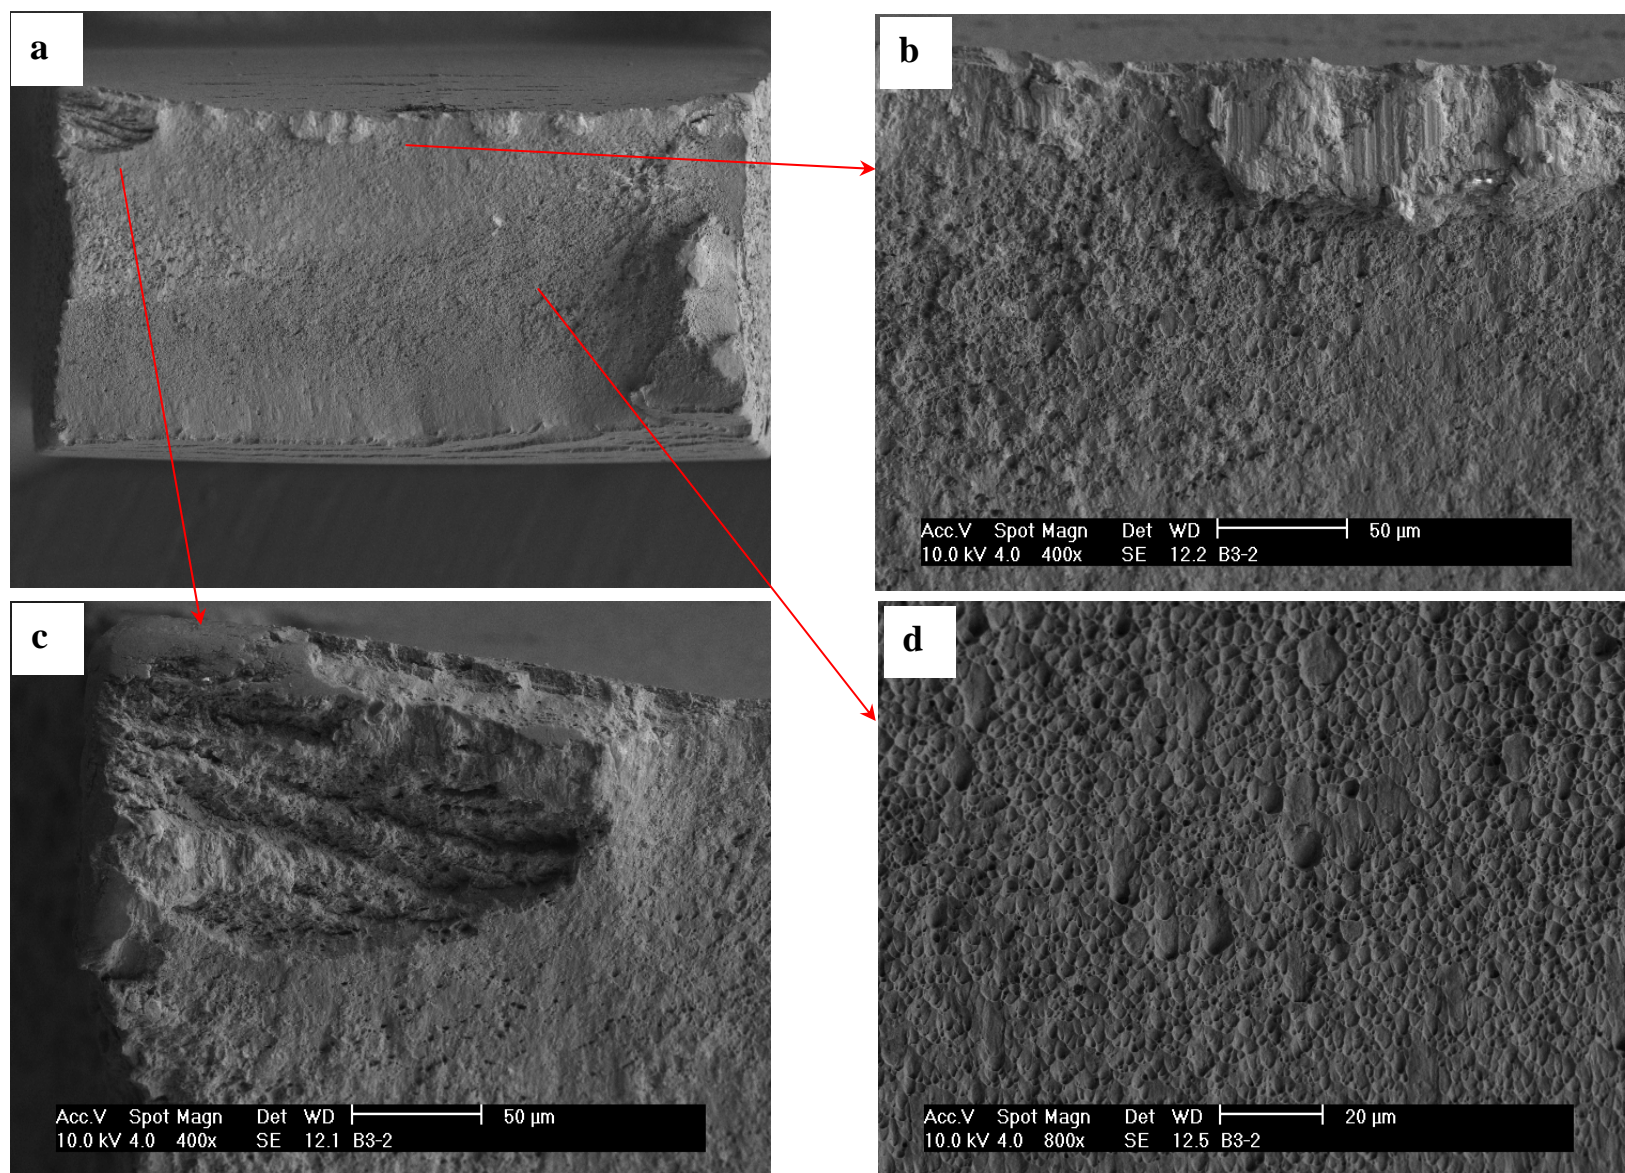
Fracture surface of SA Type 316LN SS irradiated to 11.8 dpa and tested in PWR water (specimen B3-2).
